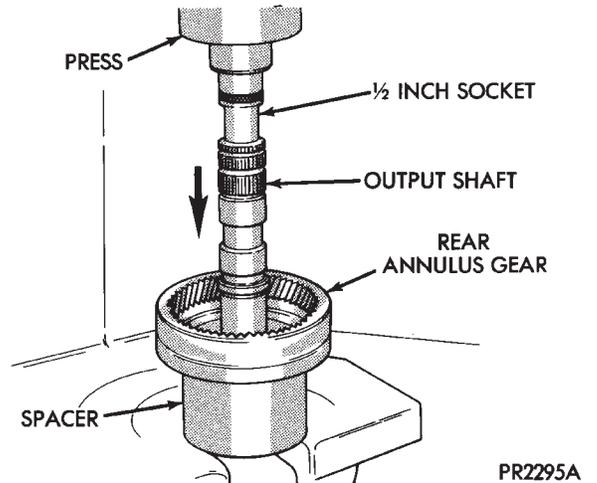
Remove Output Shaft and Rear Annulus Gear Assembly
